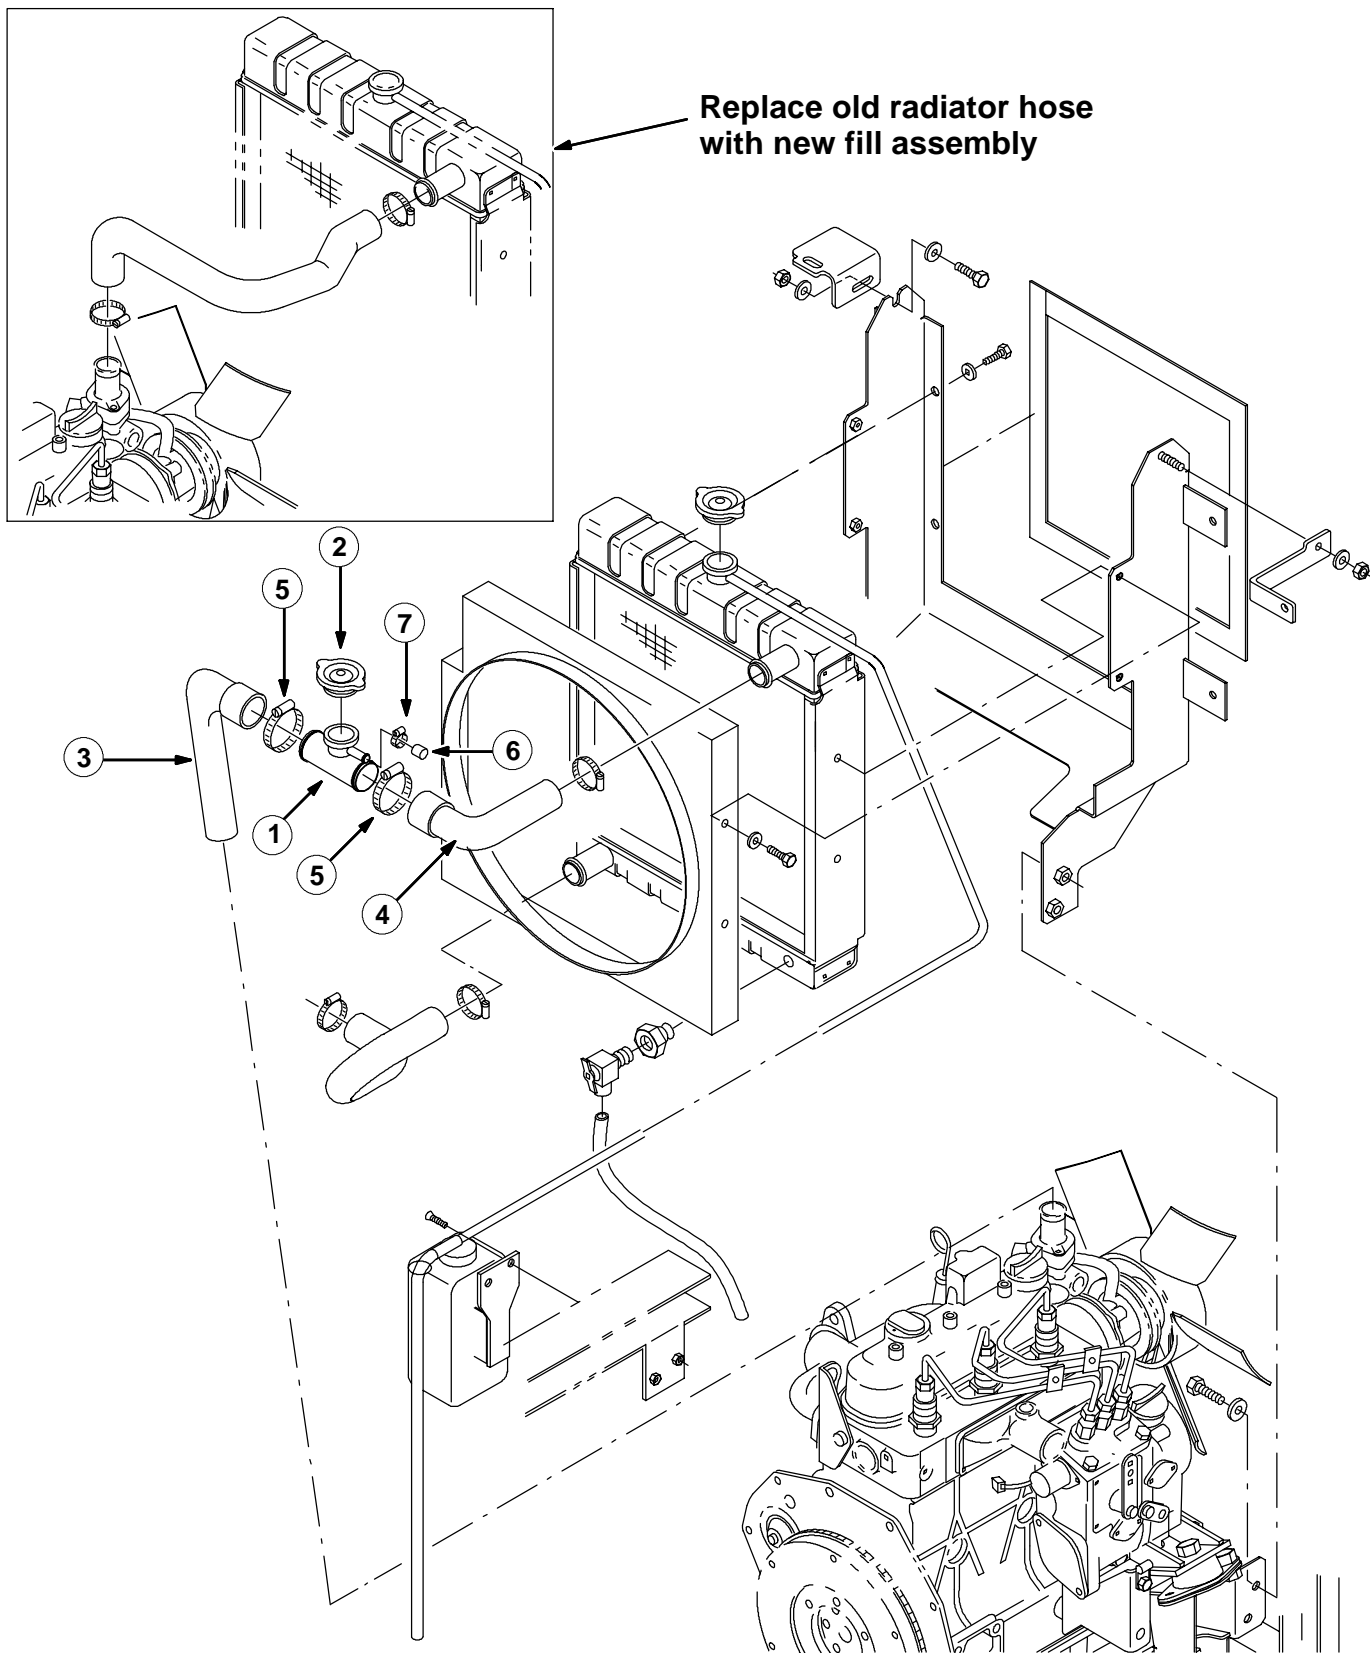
REMOTE FILL RADIATOR KIT INSTALLATION
